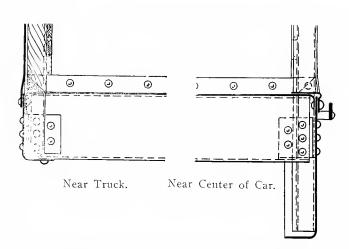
Sections Through Side Sill of Summers All-Steel Box Car. See also Figs. 264-266.
